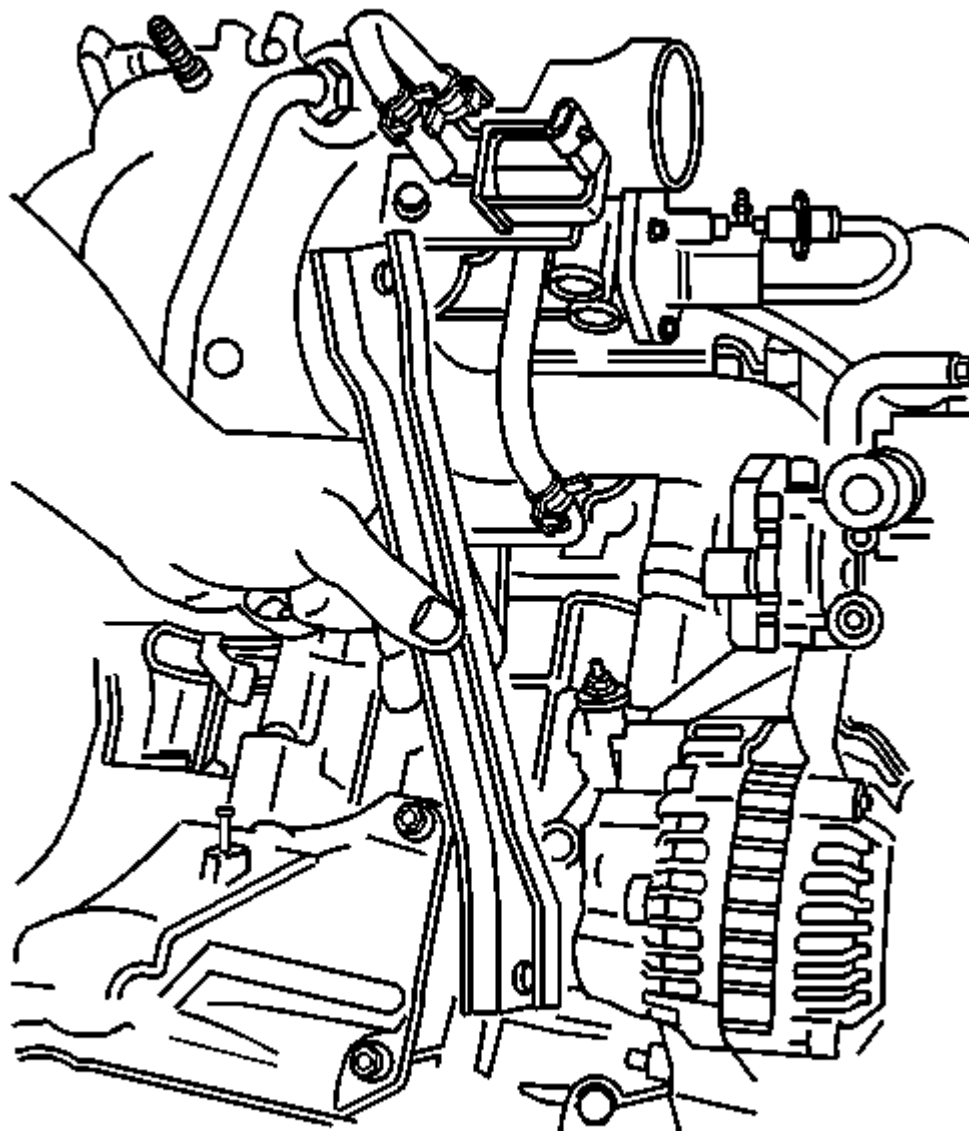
View Of Intake Manifold Front Support Bracket & Bolts
